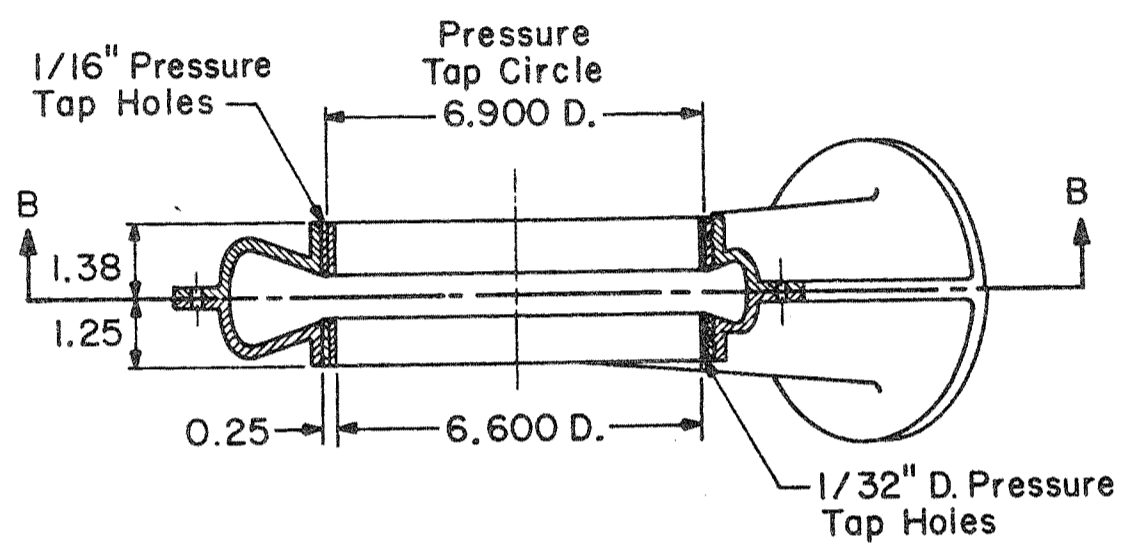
Schematic of the test section and the eccentric drive mechanism.
